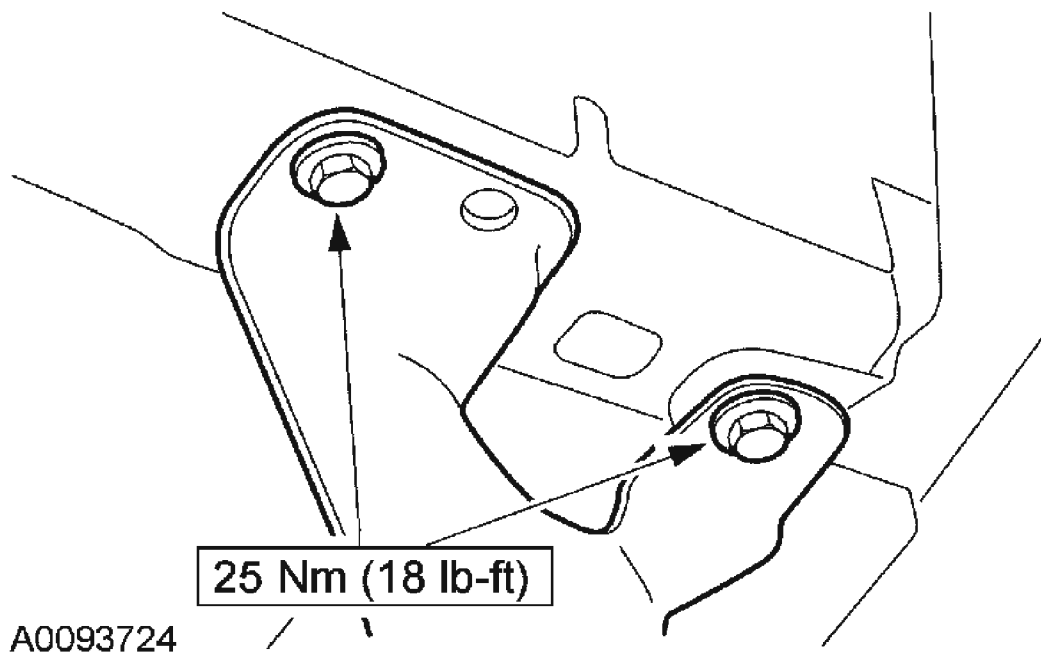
Removing Radiator Right-Hand Support Bracket Retaining Bolts
